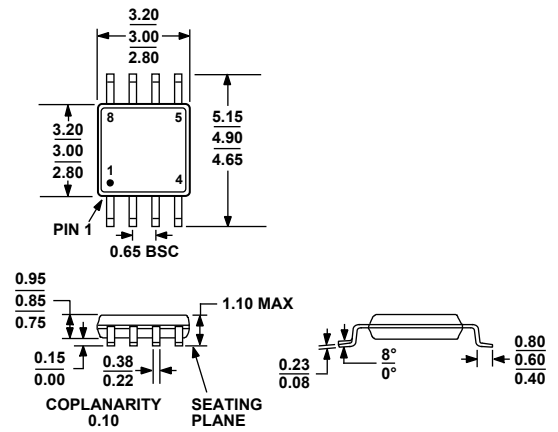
8-Lead Mini Small Outline Package [MSOP]
